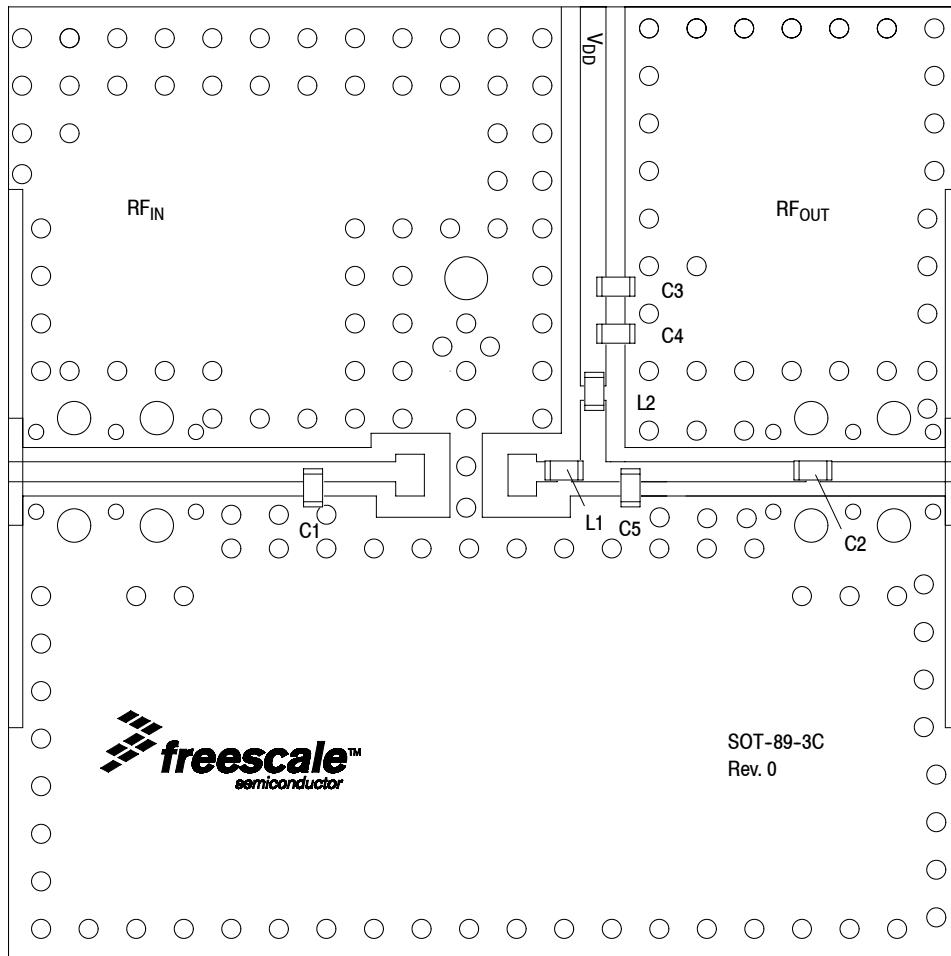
MMG20271H9T1 Test Circuit Component Layout
